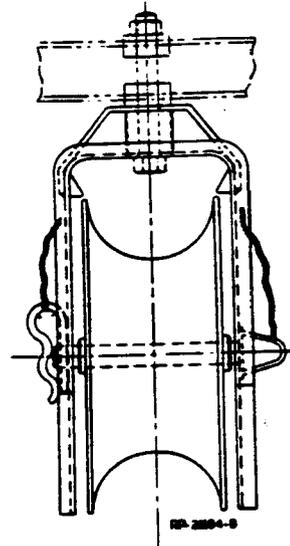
R-4145 DETAIL 3 (12 INCH) CABLE SHEAVE MOUNTED TO UNDERSIDE OF FRAMING BARS (PAR. 3.312)
